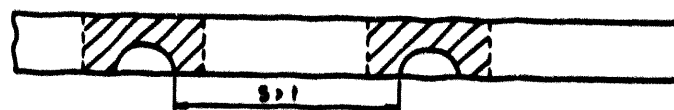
SPECIMEN AND DEFECT DIMENSIONS
